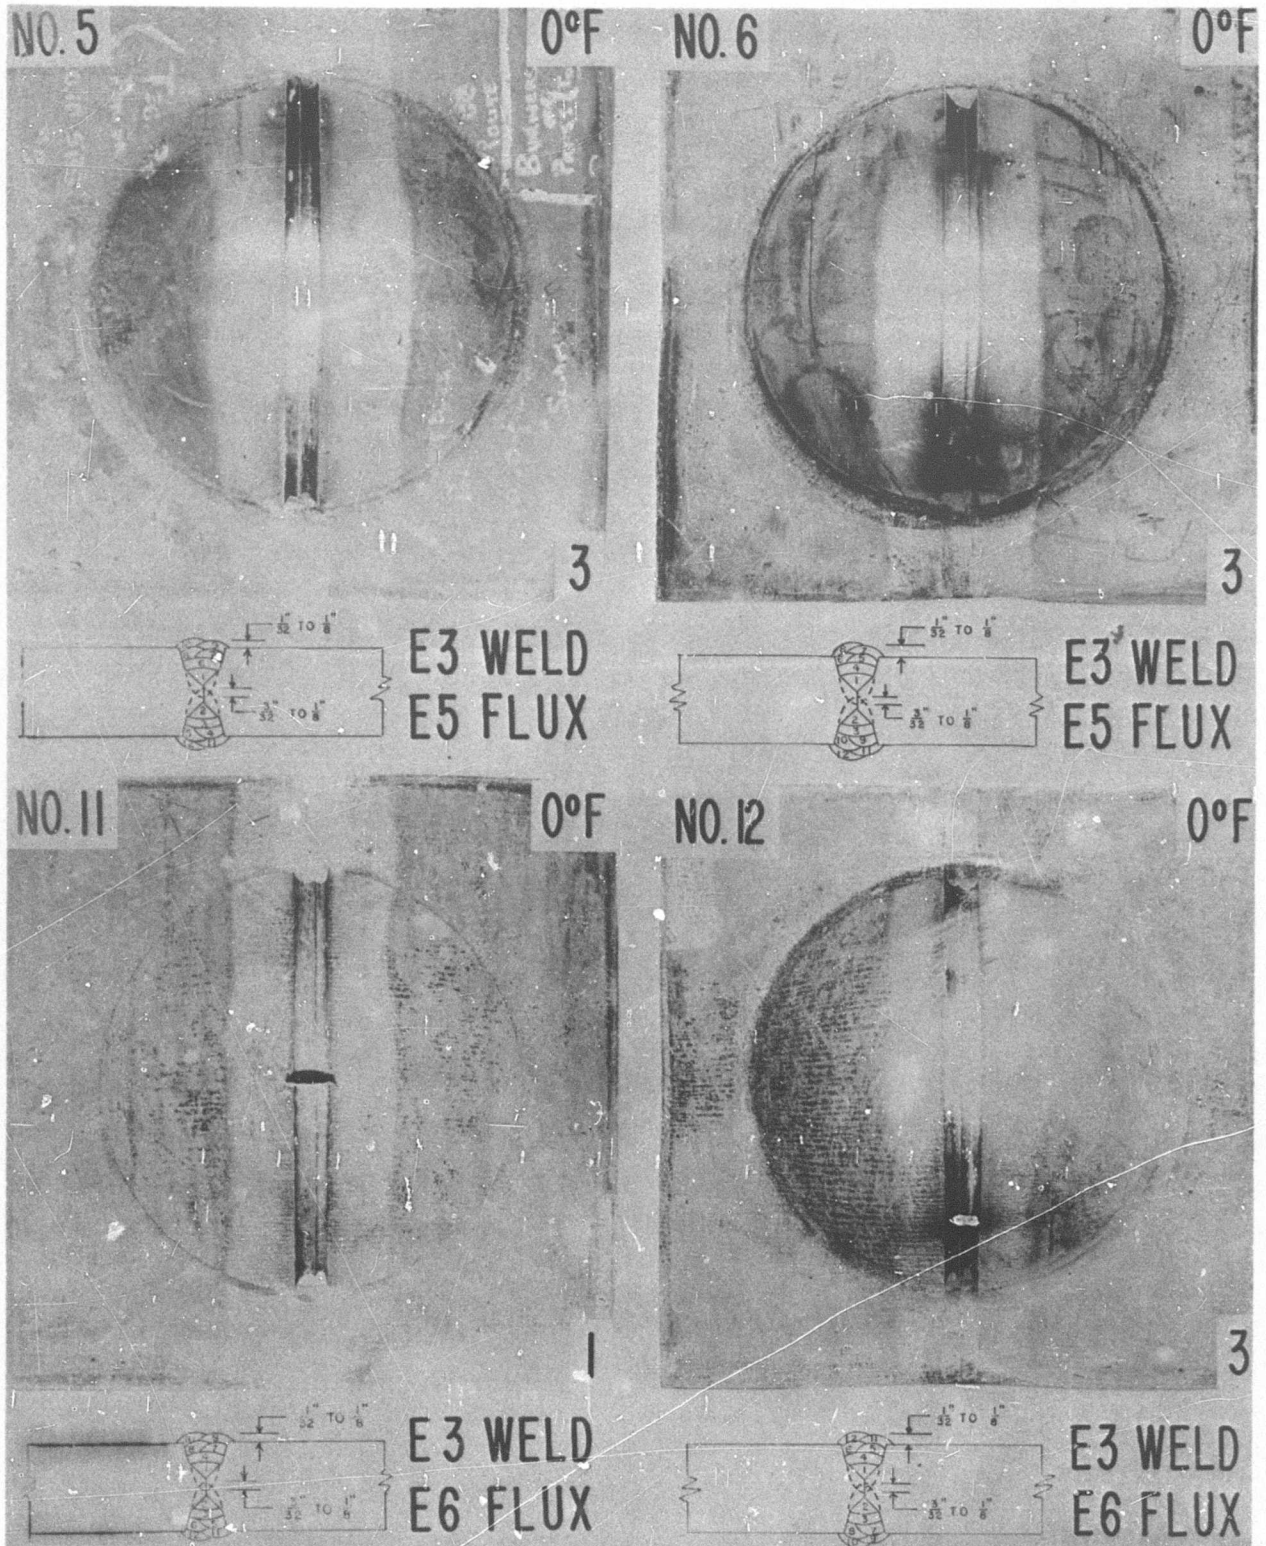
Explosion-bulge test fracture characteristics of submerged-arc weldments fabricated by MINSY
